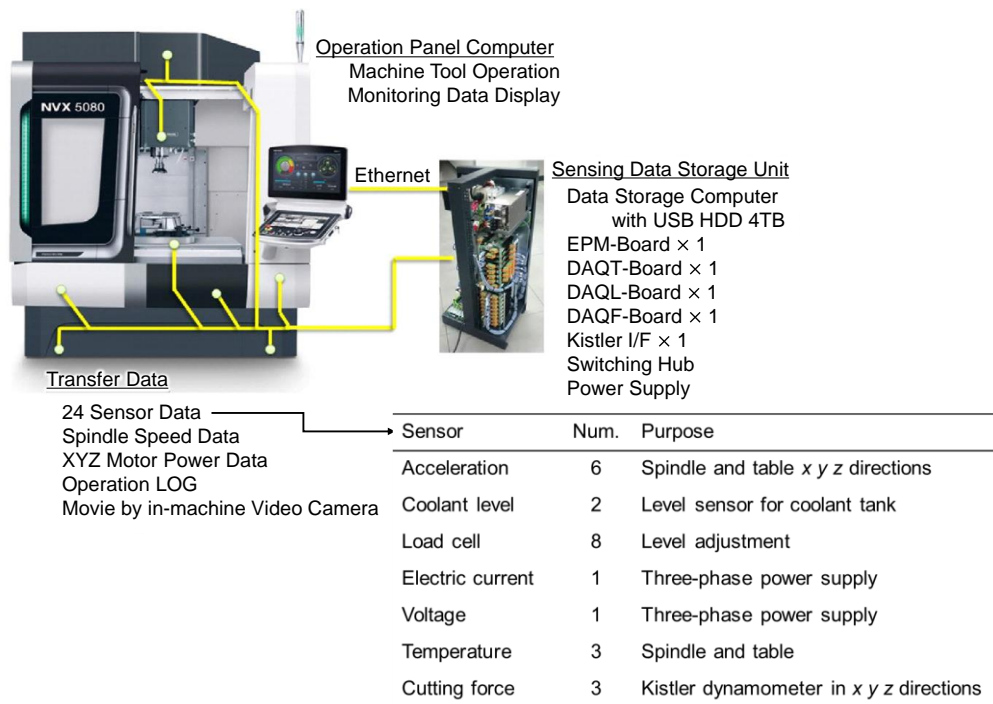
Sensory machine tool with sensing data storage system [30] (The figure is used with permission from Elsevier.)
